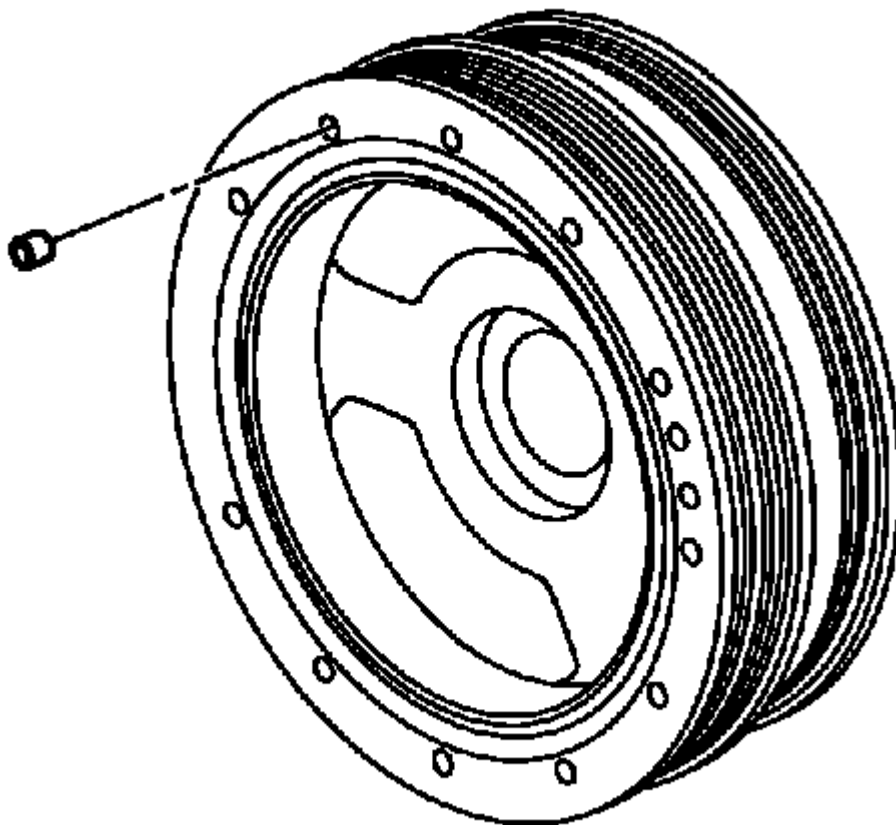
View Of Balancer Weights In Crankshaft Balancer
